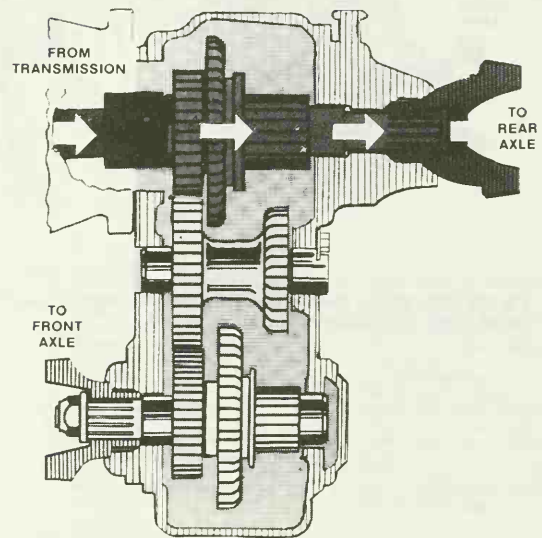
Power flow in two-wheel drive. (American Motors Corporation)
